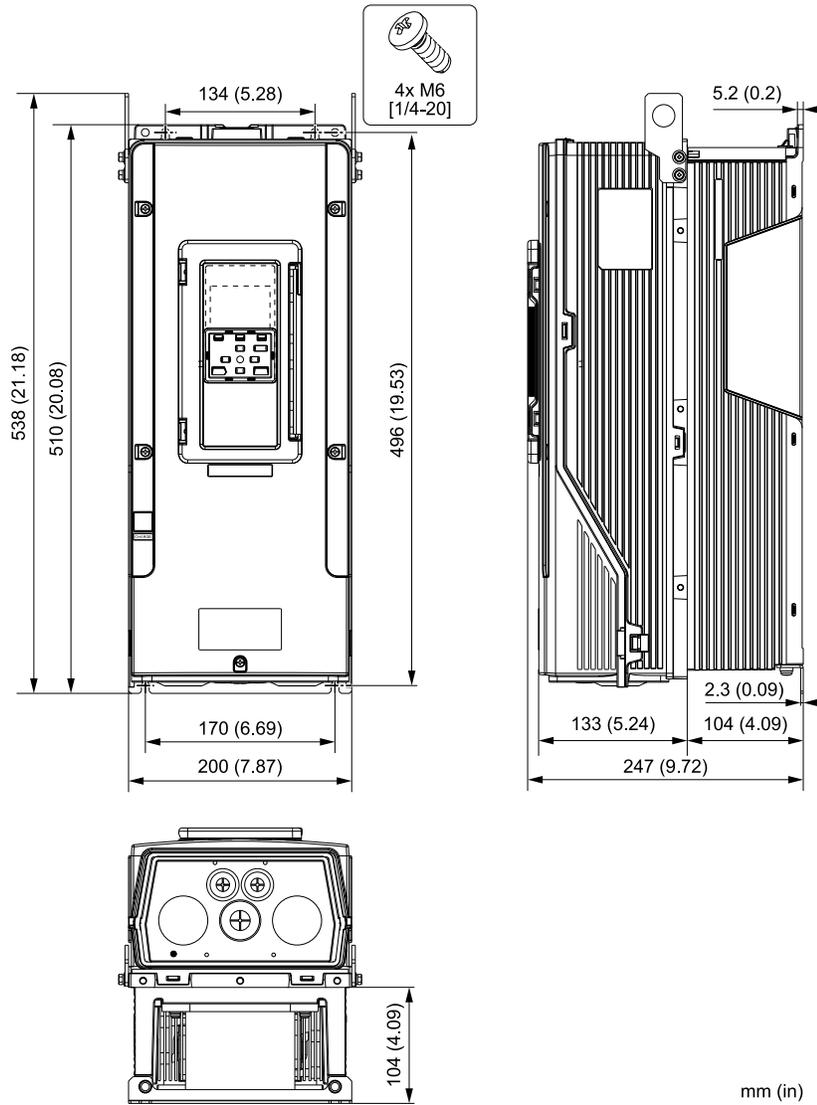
Exterior and Mounting Dimensions Diagram 4
